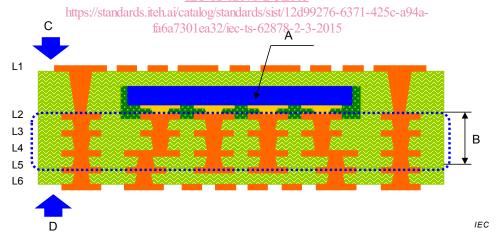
Definition of top and bottom surfaces for mounting on a mother board
